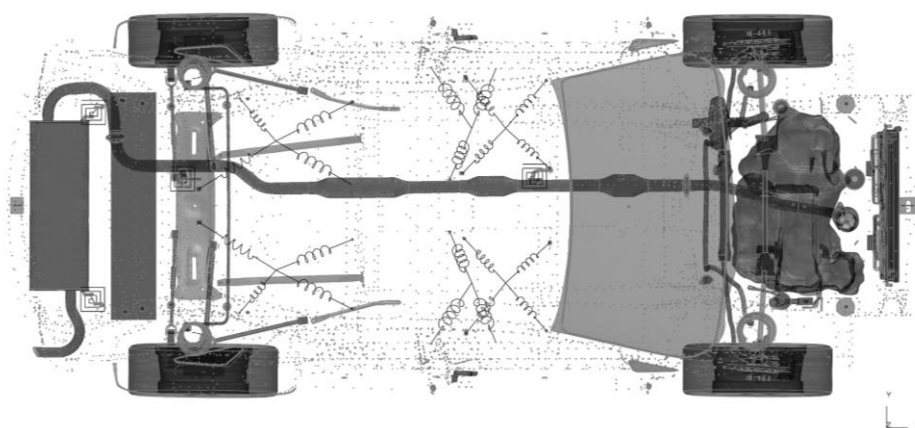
RMR Omitted Parts, Undercarriage view (Venza)
